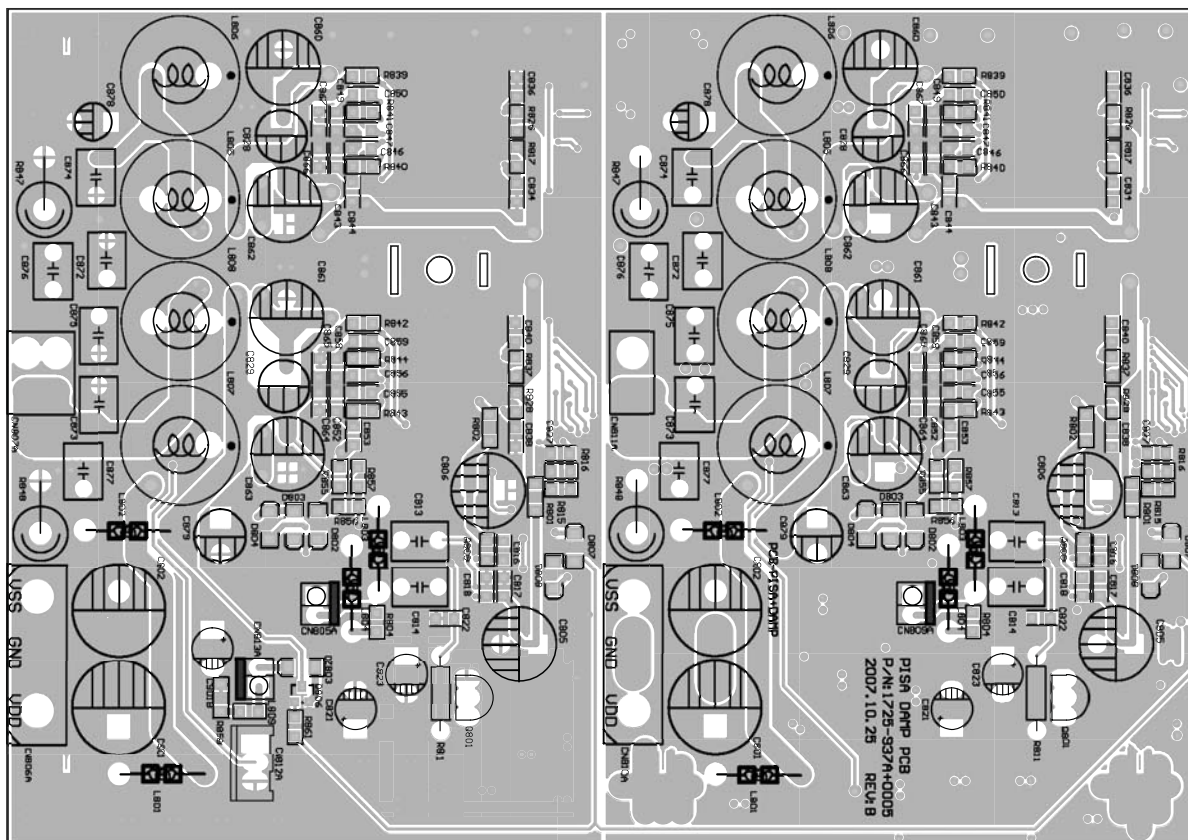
Class-D Amplifier PCB Assembly, P/N: 312945, Top Etch Layout
